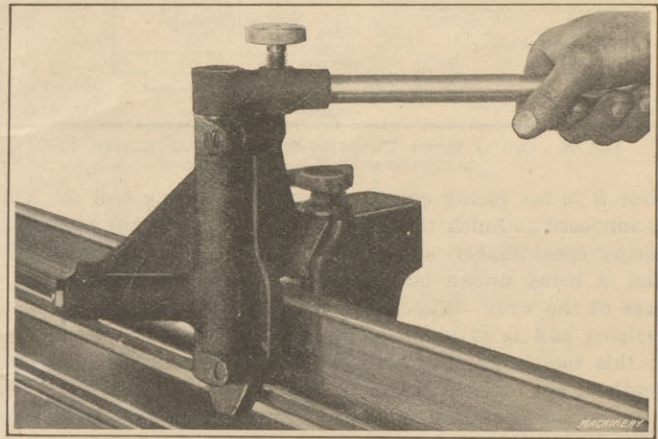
Radius Wheel Truing Device for forming Grinding Wheel for grinding Shrapnel Shell Nose
